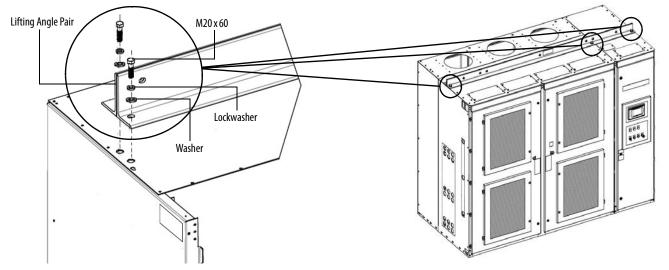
Install Fasteners from the Lifting Angles to the Drive in six places
